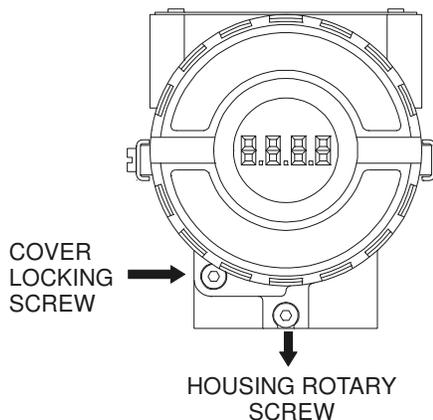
Cover Locking and Housing Rotation Set Screw
